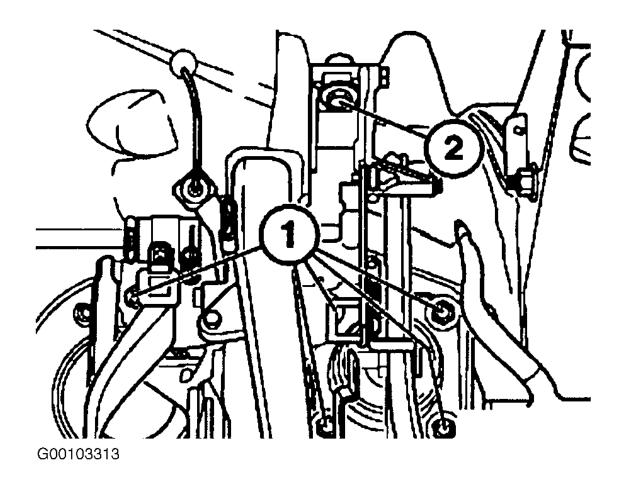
Locating Pedal Assembly Nuts & Bolts Courtesy of BMW OF NORTH AMERICA, INC.
